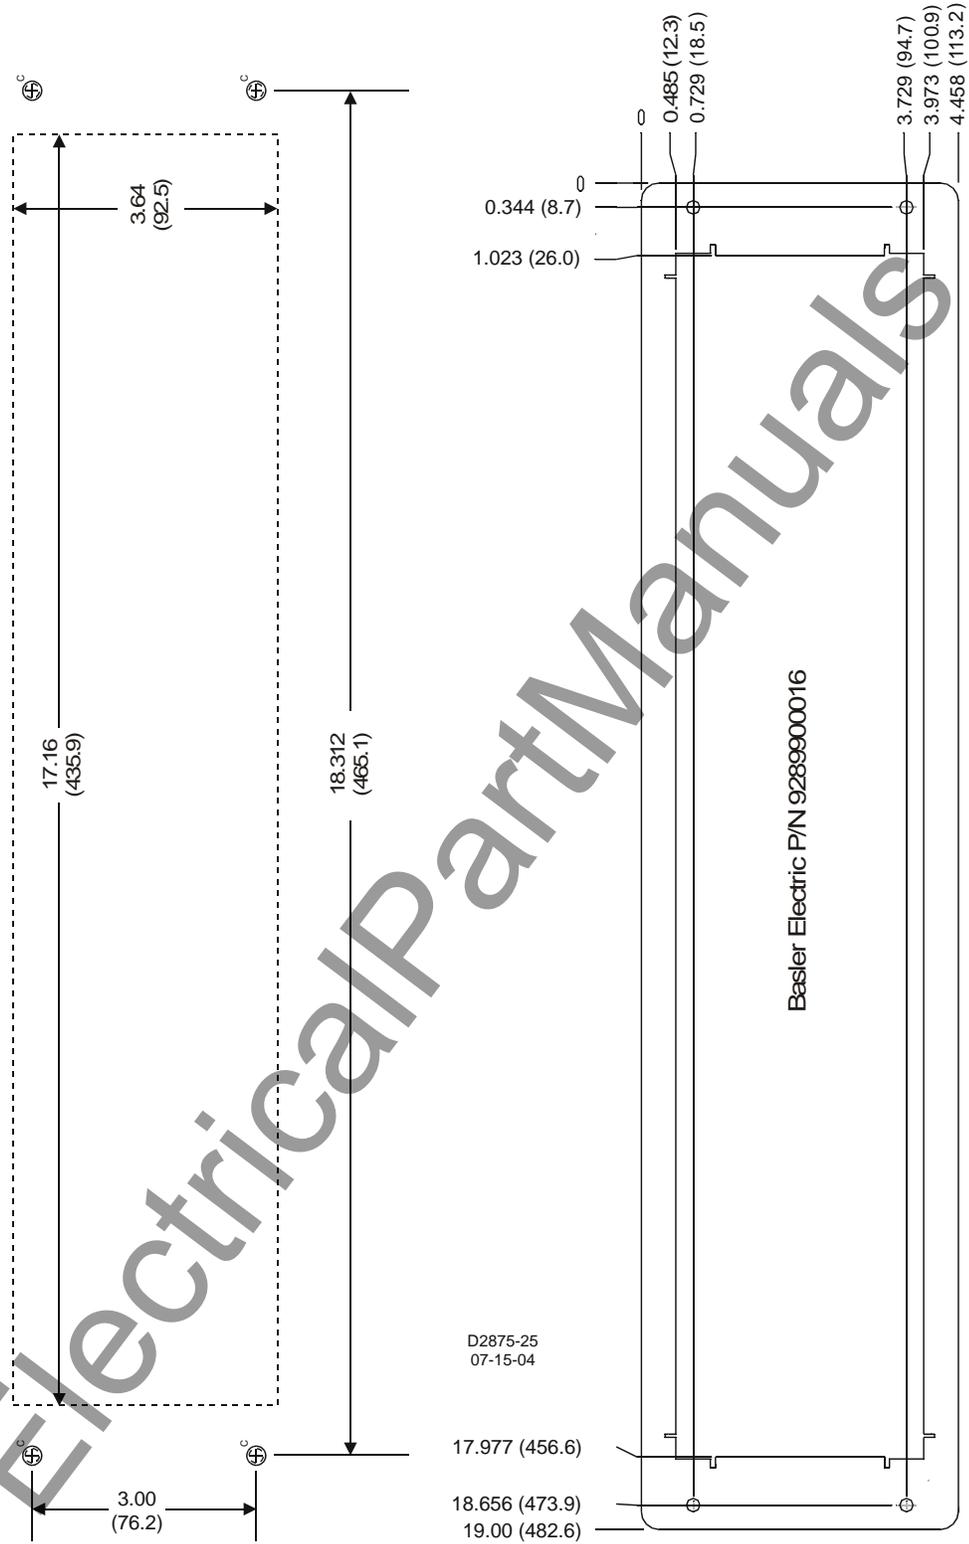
Dovetailed H1 Relay Escutcheon Plate and Cutout Dimensions
